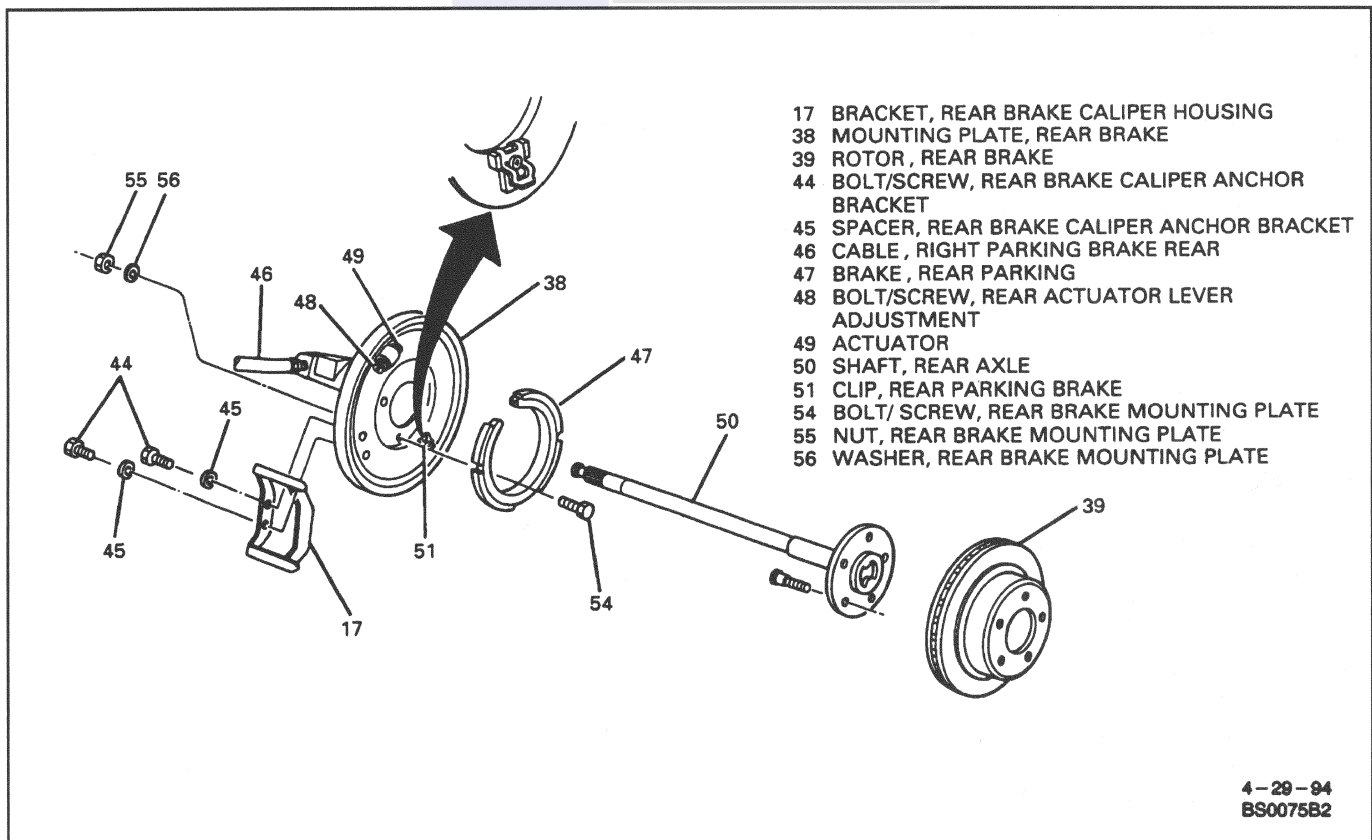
Rear Brake Rotor, Caliper Anchor Bracket, and Mounting Plate
